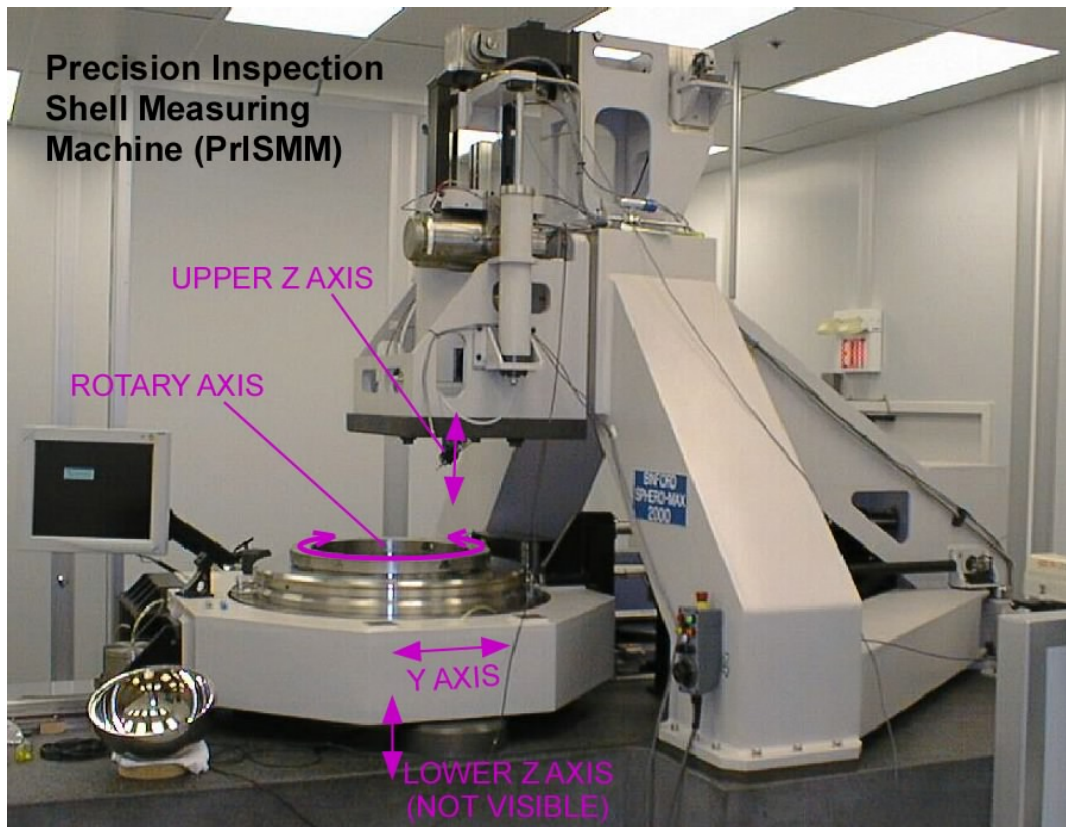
The Precision Inspection Shell Measuring Machine (PrISMM)
